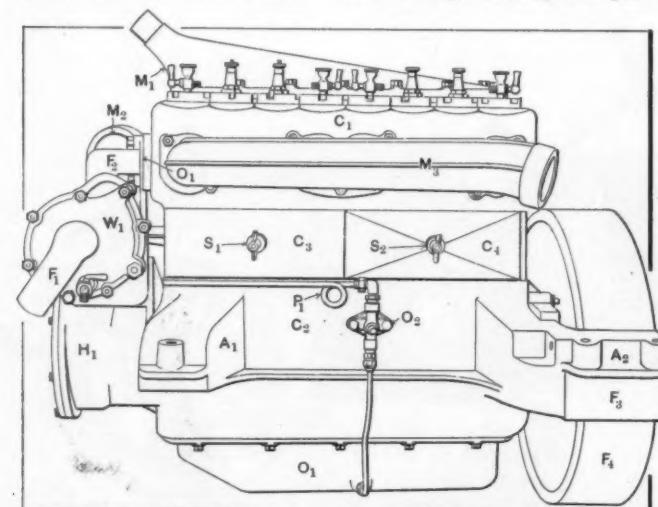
Elevation of the motor looking at the left-hand side, presenting symmetry of design and covers over the valve mechanism
